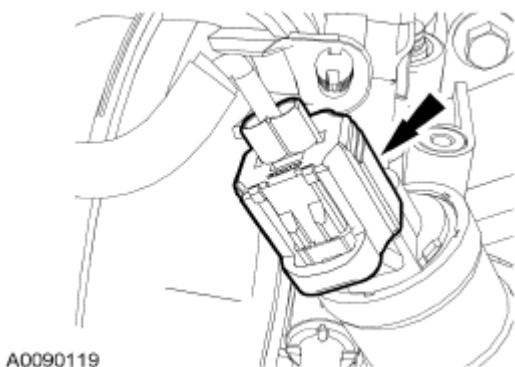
Locating Idle Air Control (IAC) Motor Electrical Connector
